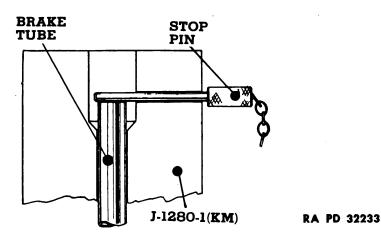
Installing Tube in Tool KM-J-1280 (41-T-3076-35)
